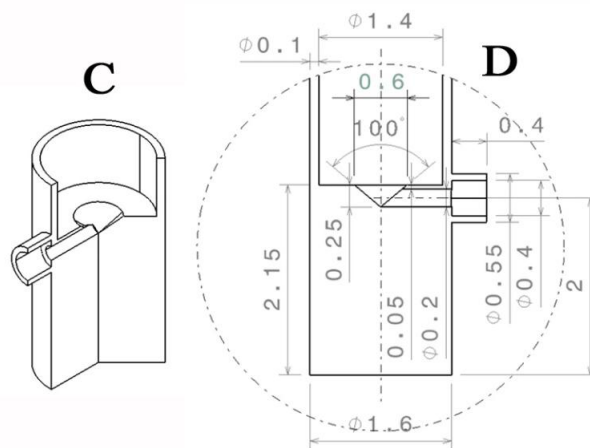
Kiel probe prototype tip detail. 3D section view (C) and tip dimensions given in mm (D).
